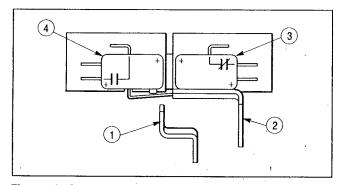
Position 2. Springs charging; motor not yet cutoff.
